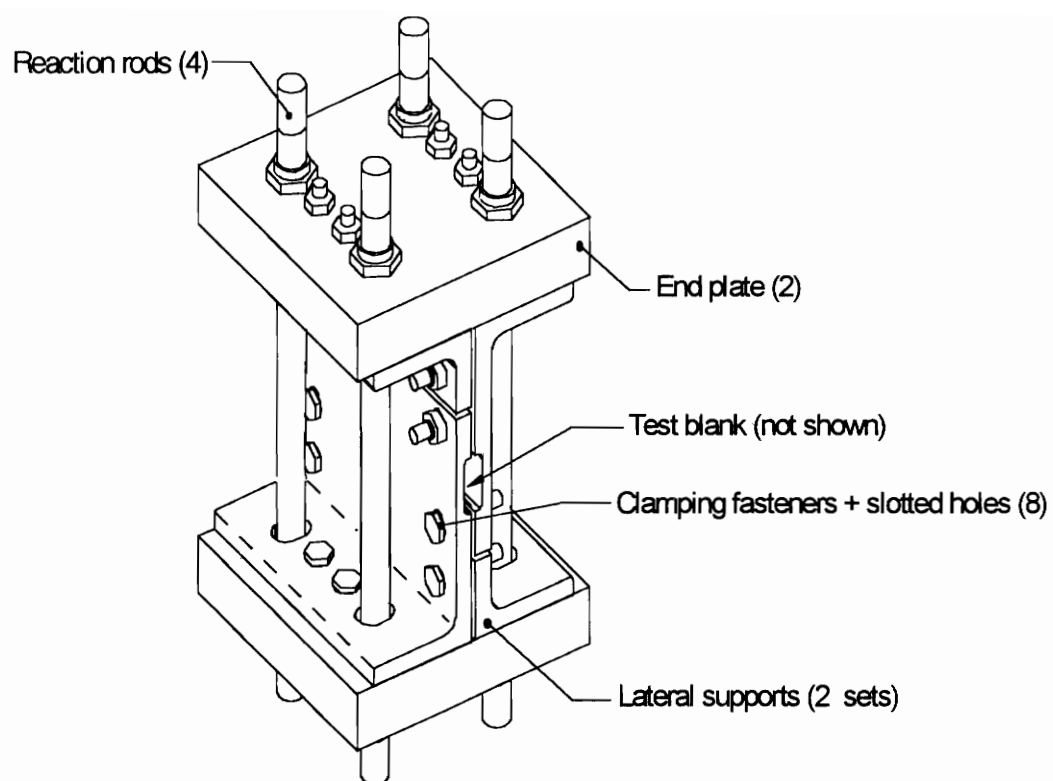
Loading fixture (Drawing courtesy of Boeing).
